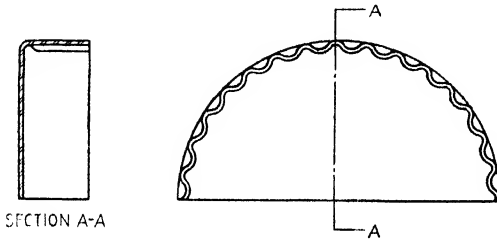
Stamping having an edge that is formed by crimping rolls.
